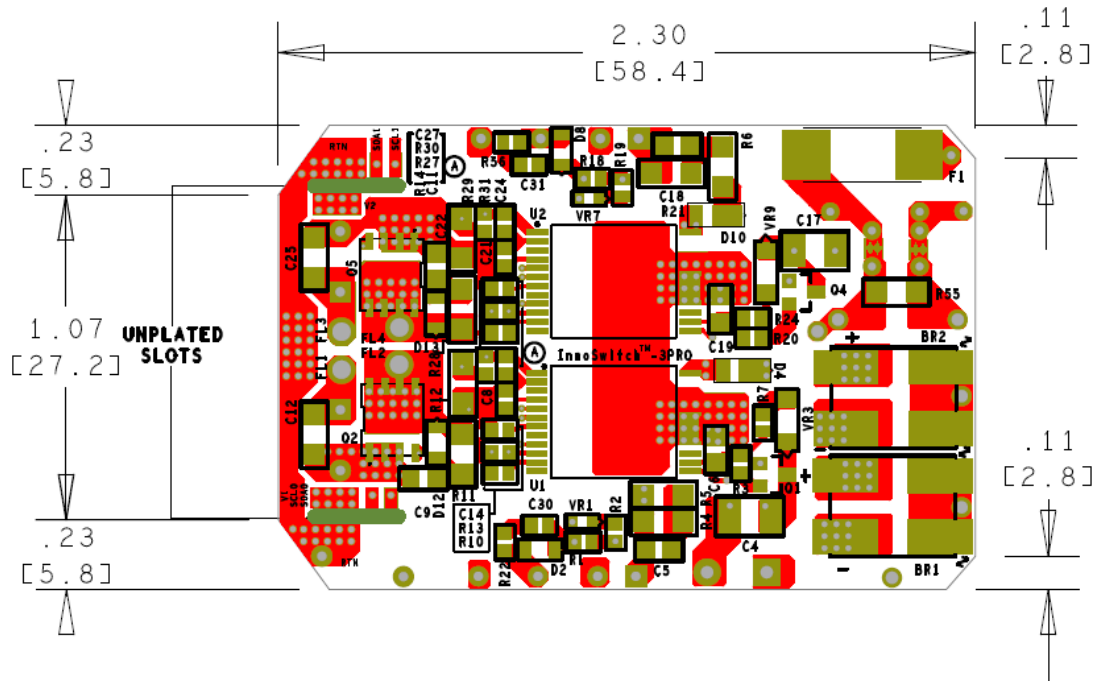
DER-1024 Mother Board Rev B Printed Circuit Layout (Bottom).
